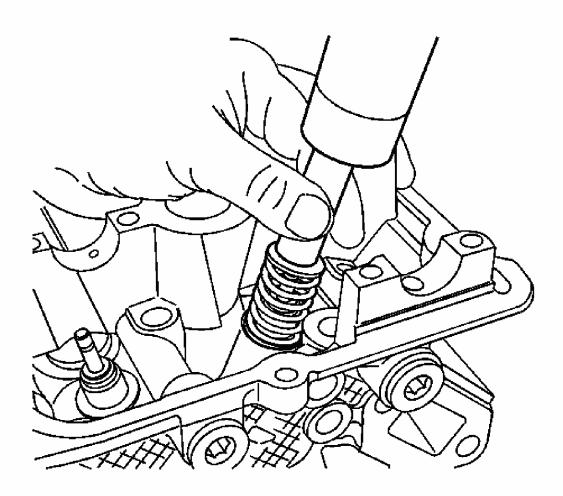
Tapping On Valve Spring Retainer Courtesy of GENERAL MOTORS CORP.
